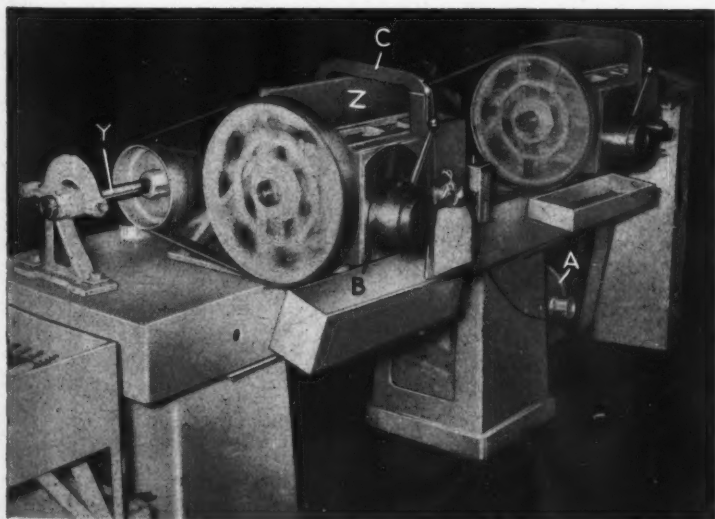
Equipment for testing and running-in Dialmatic feed gearboxes before they are fitted to IMOR lathes
